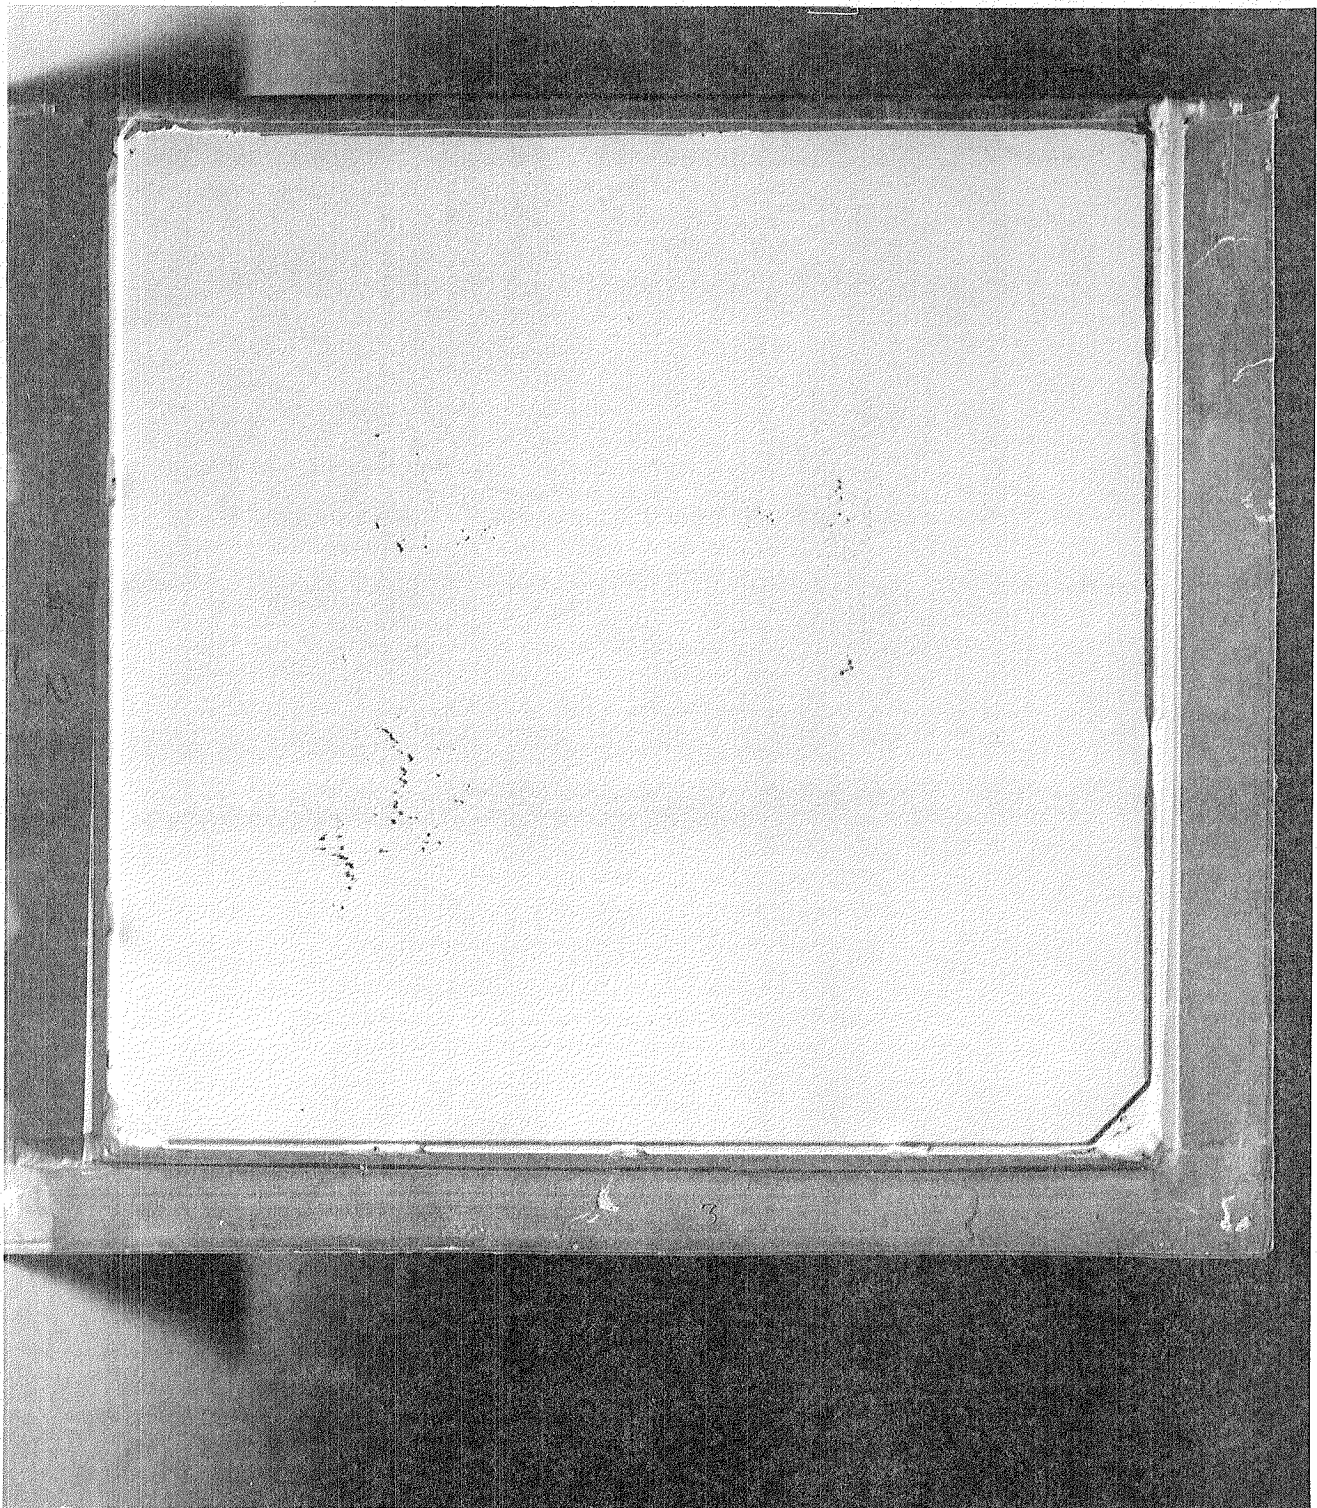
PANEL NO. 3 TOP FACE SHEET AFTER CHEMICAL MILLING
